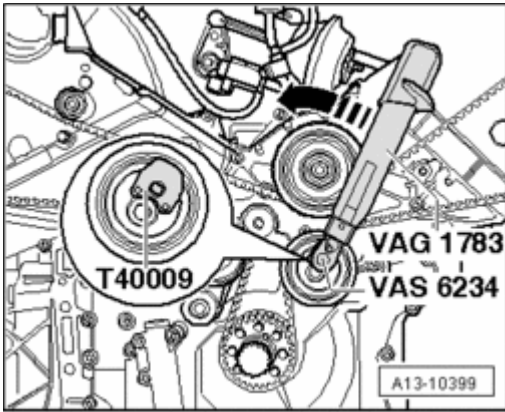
Tightening Toothed Belt By Turning Eccentric Pulley Using Tightener Pulley Wrench T40009 And Turning Torque Wrench V.A.G 1783 Using Ratchet VAS 6234
